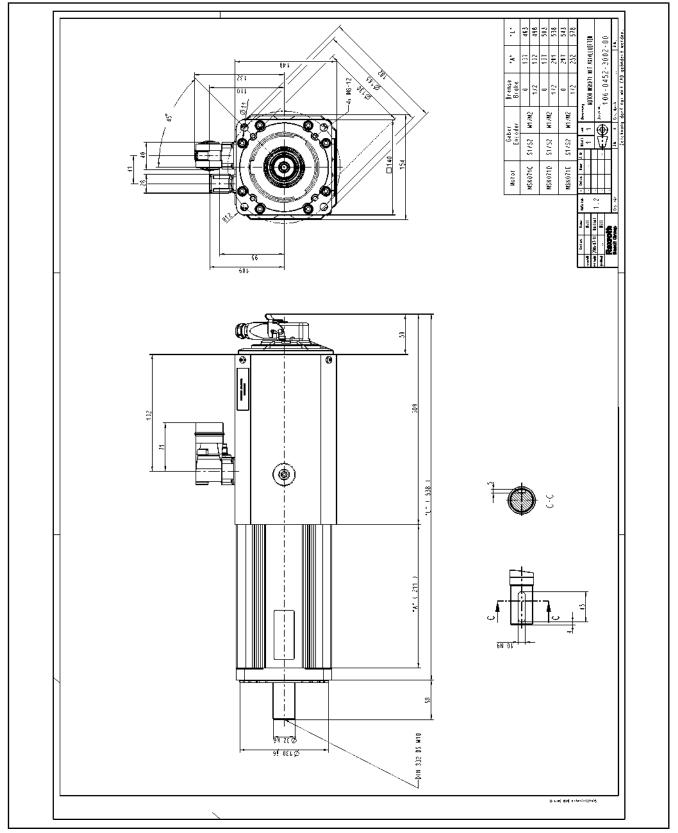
Dimension sheet MSK071 with axial fan unit
